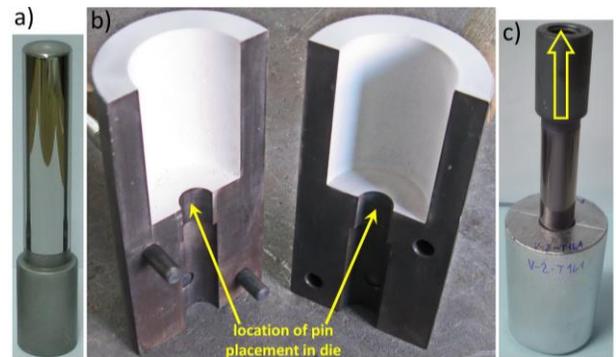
a) Pin sample, b) experimental casting die, c) pin-casting assembly
